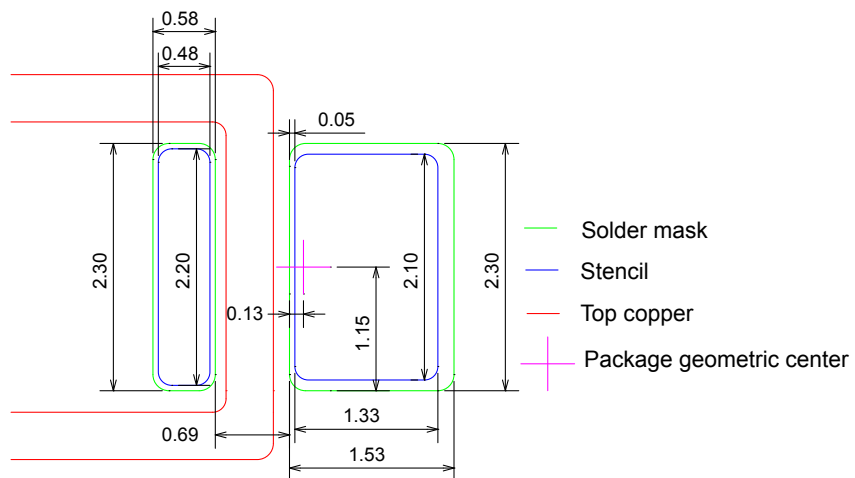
Recommended PCB solder pad layout for LUXEON 3030 2D Line.
